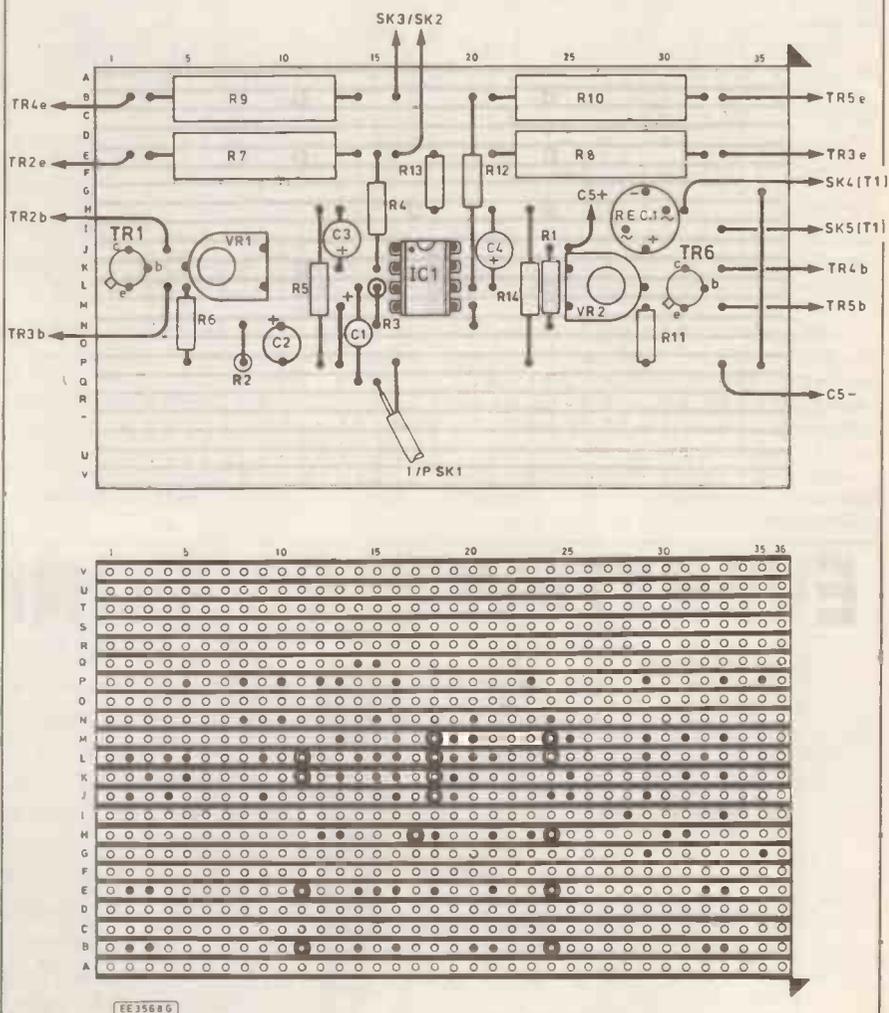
Stripboard component layout and details of breaks required in the underside copper tracks.
